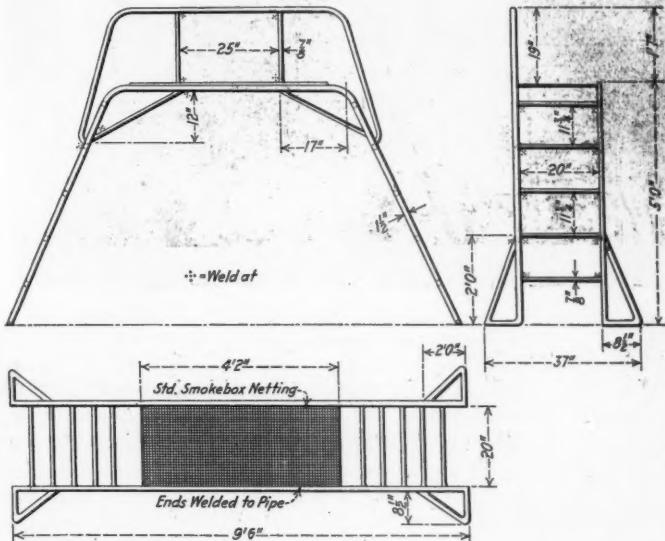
Details of Convenient Platform Illustrated in Fig. 8
